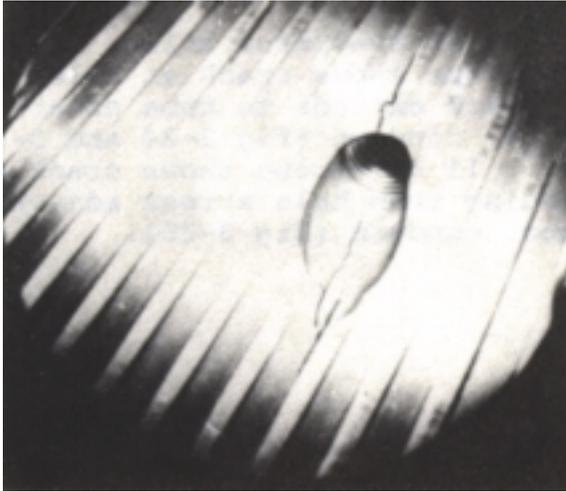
Evacuator hole: lower: external crack; upper: internal crack on feather edge of hole; upper: internal crack on outer side of hole.
